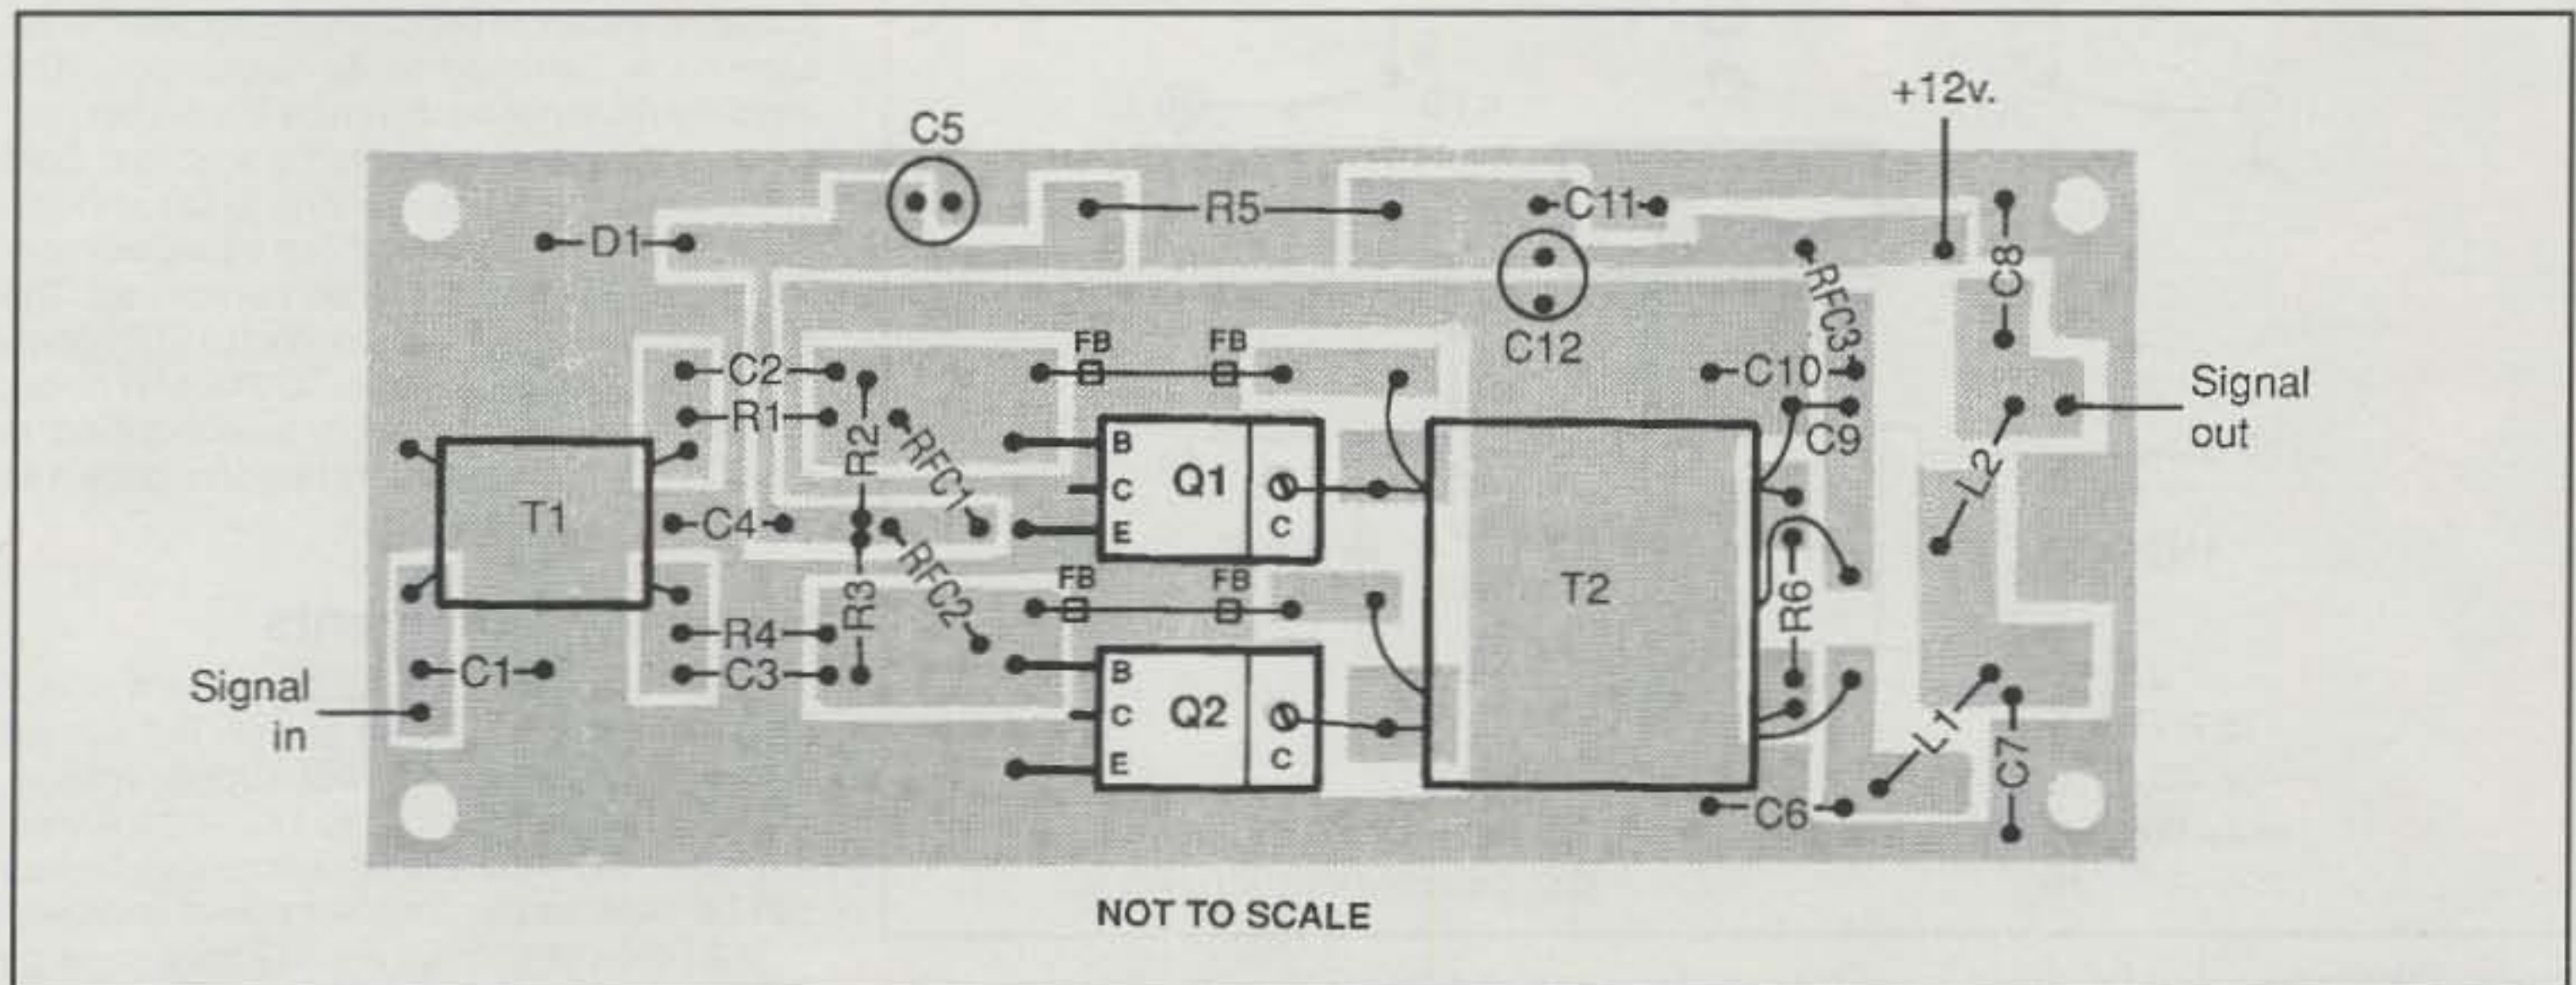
Expanded view (not to scale) of the parts placement on the etched-foil side of the amplifier PC board.
